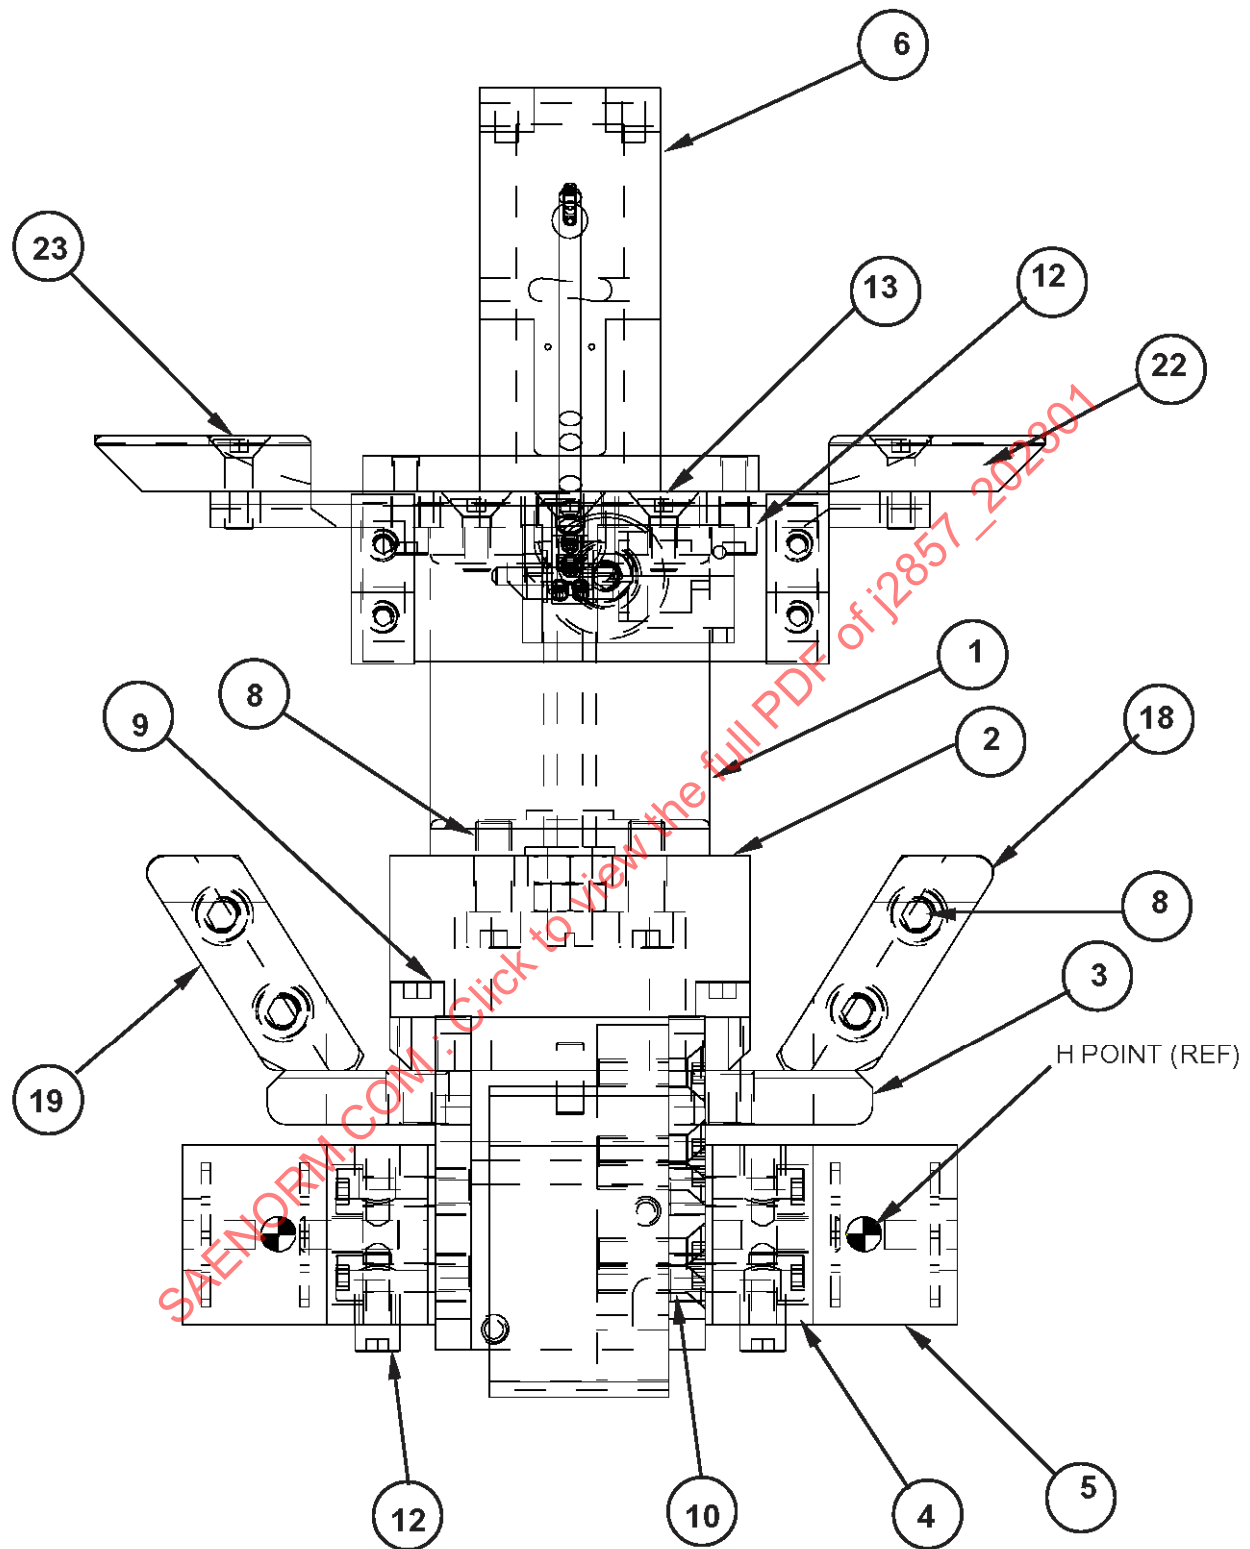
FRONT VIEW OF LOWER TORSO ASSEMBLY
